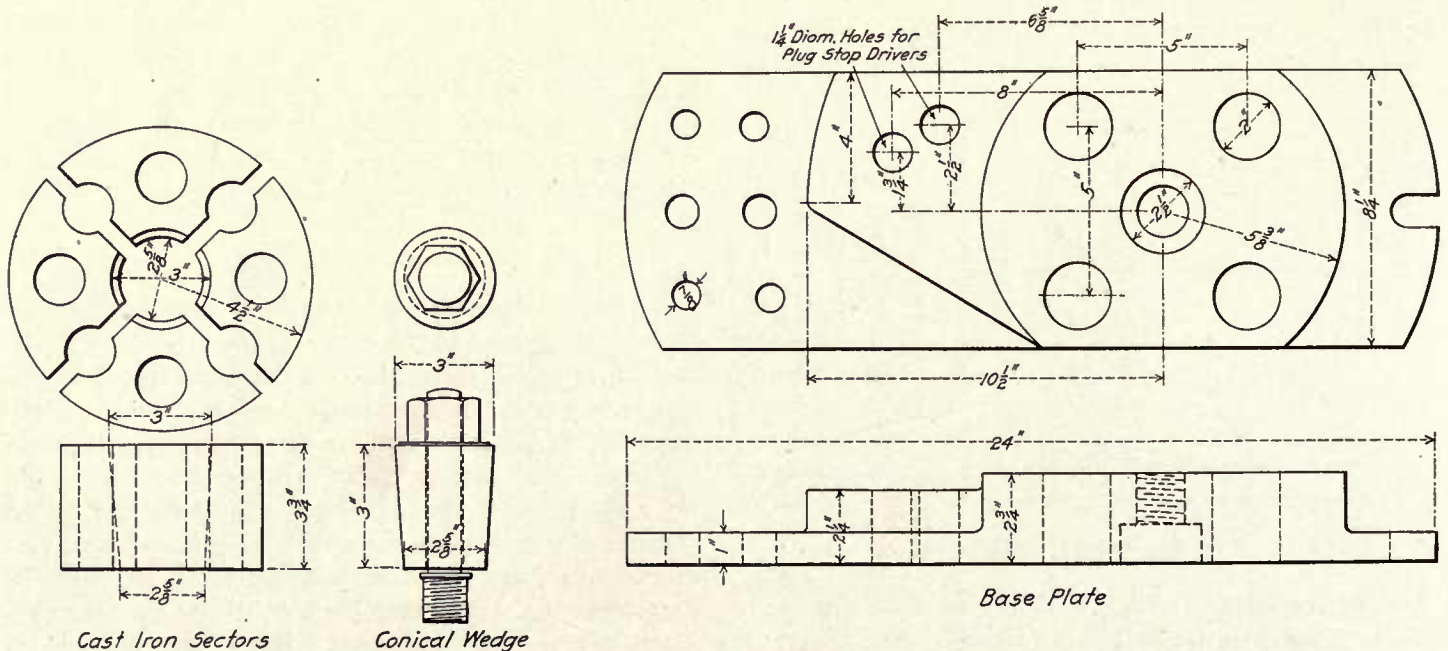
Mandrel for Turning Eccentrics on Boring Mill.
